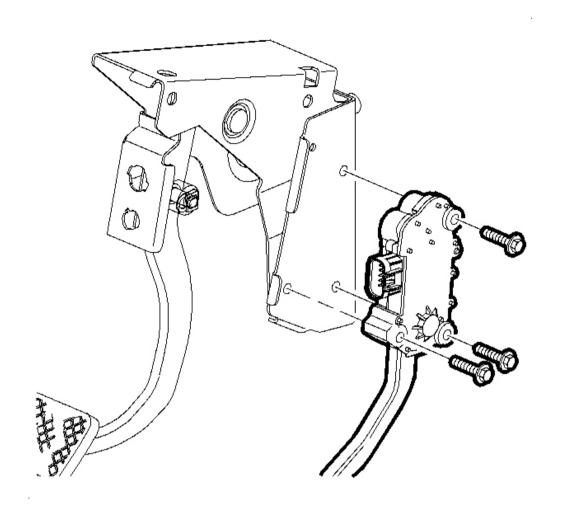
Removing/Installing Accelerator Pedal Assembly Courtesy of GENERAL MOTORS CORP.
